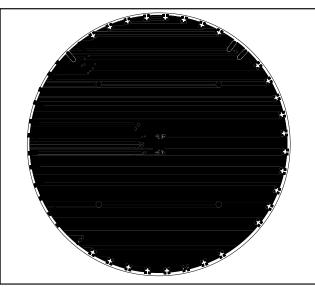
MAX105 EV Kit PC Board Layout—Solder Side
